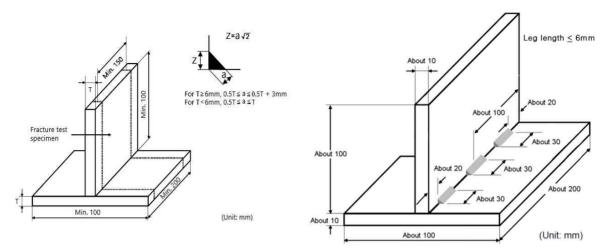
Dimensions and types of test assembly for fillet welds
